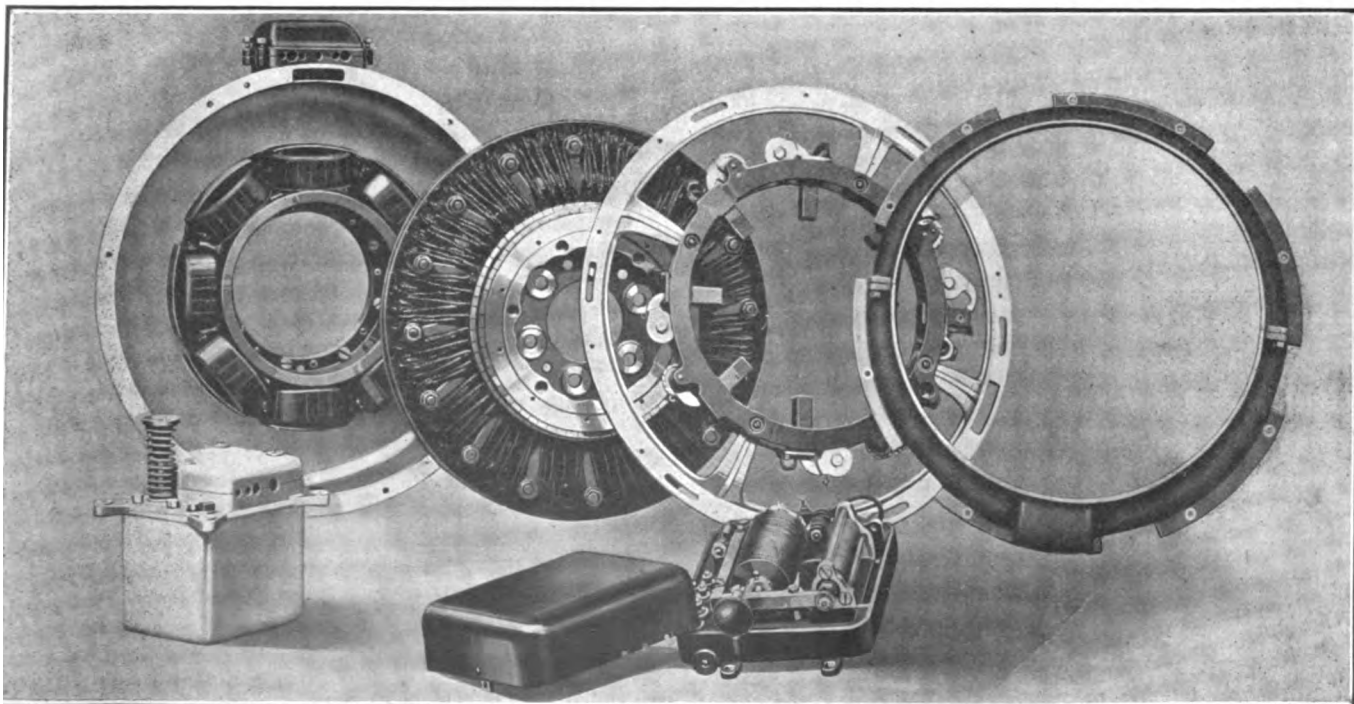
View of the assembly of the motor generator, the switch, starting button and dash regulator
